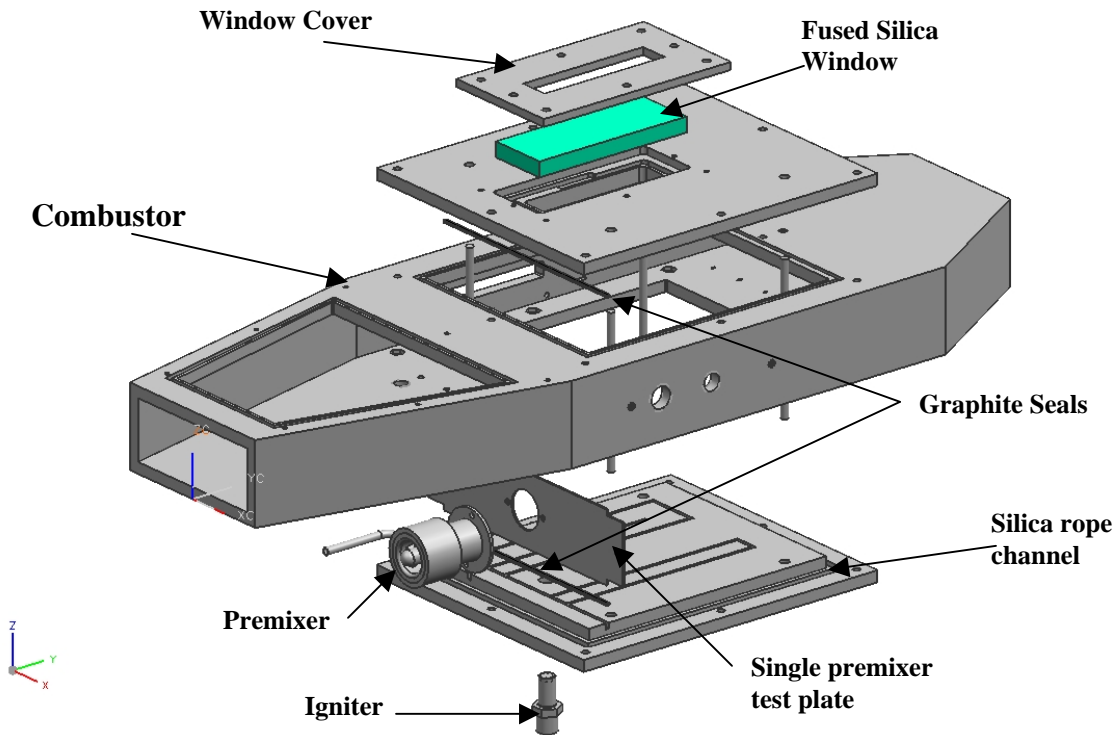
Exploded view of test section. The configuration shown is for the single premixer set-up.
